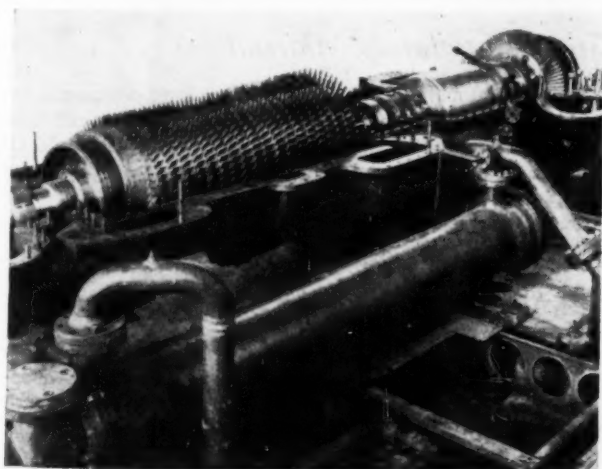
GAS-GENERATOR UNIT, CONSISTING OF COMPRESSOR AND TURBINE, IS SHOWN WITH TOP CASING REMOVED
